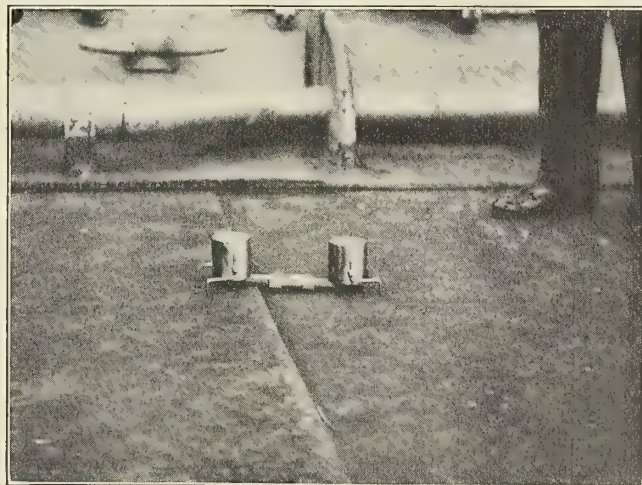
Scissors Gage Spanning Lap Joint on Deck Plates
